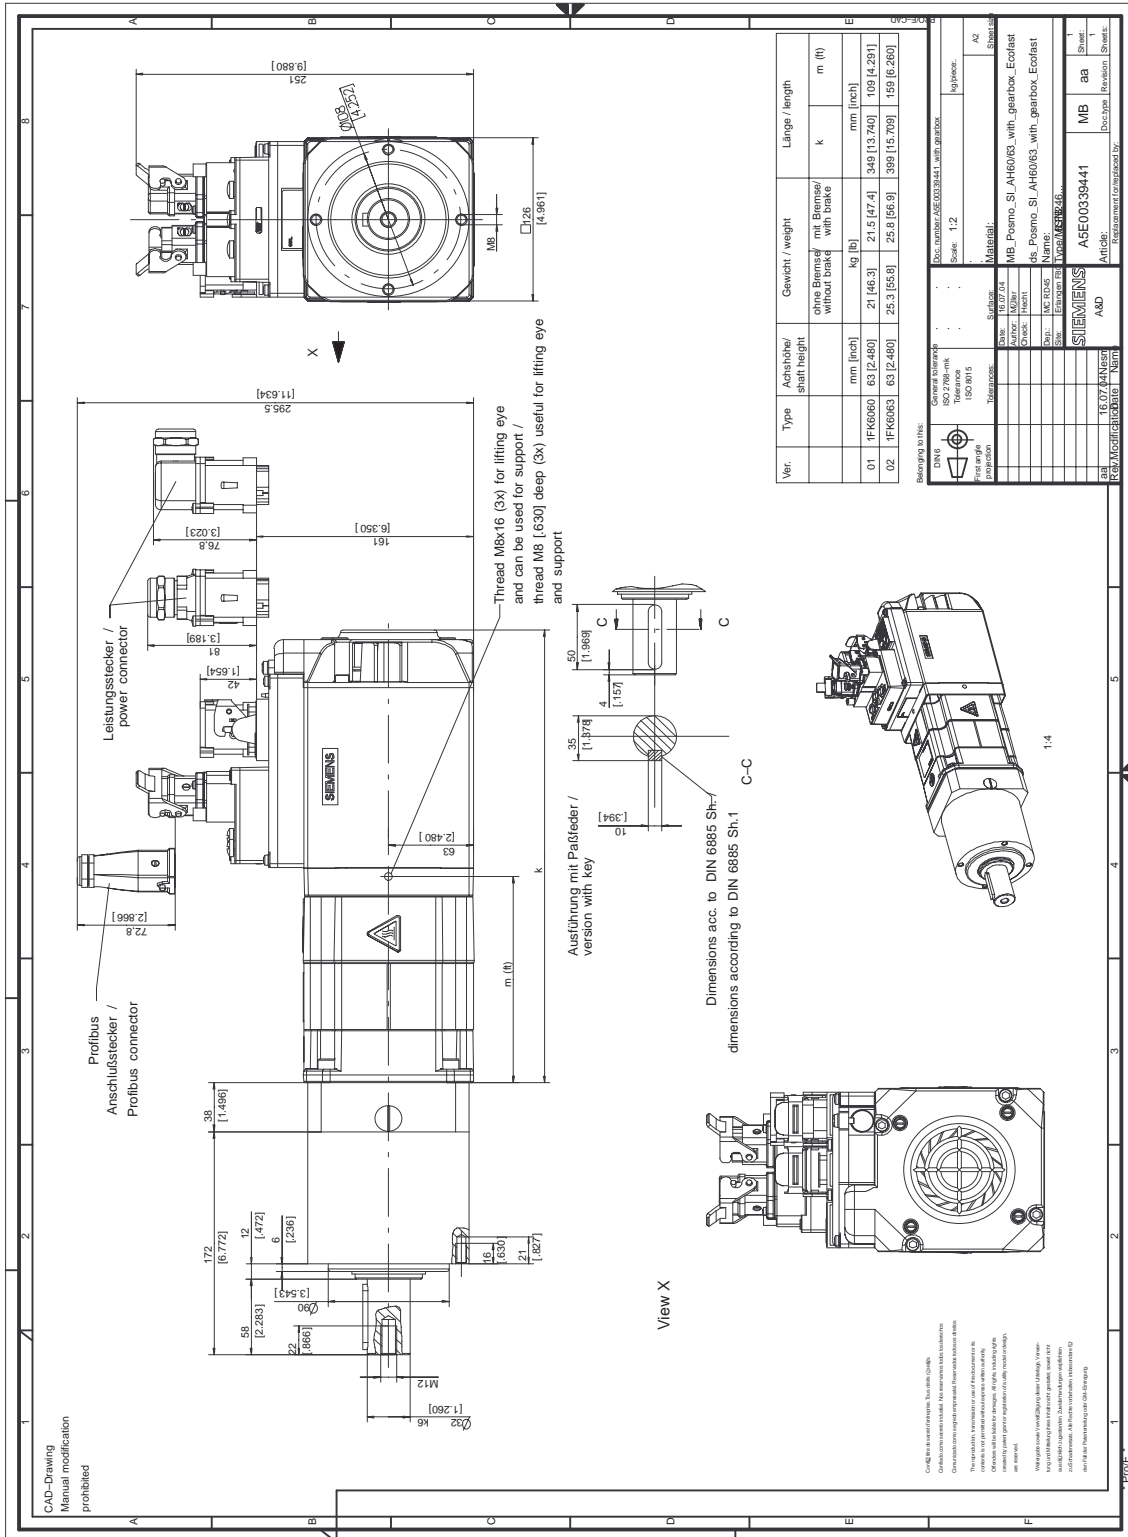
Dimension drawing POSMO SI 6SN246□-2CF□0-1G□□ with gearbox LP120-M01
